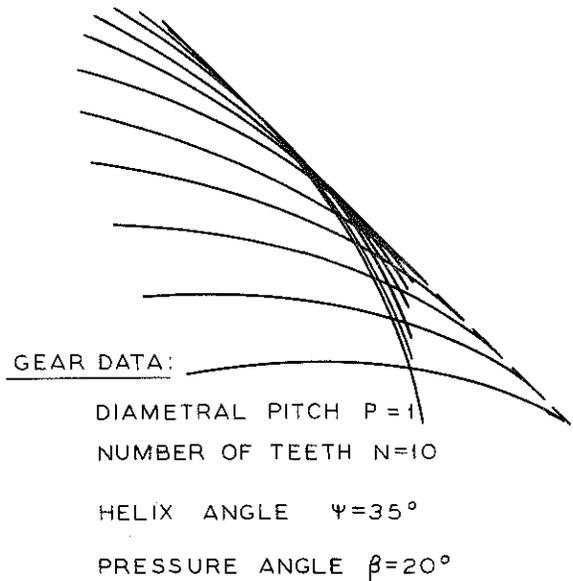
An example of a "HELGEAR" drawing to test the accuracy and profile of an involute helical gear tooth.
